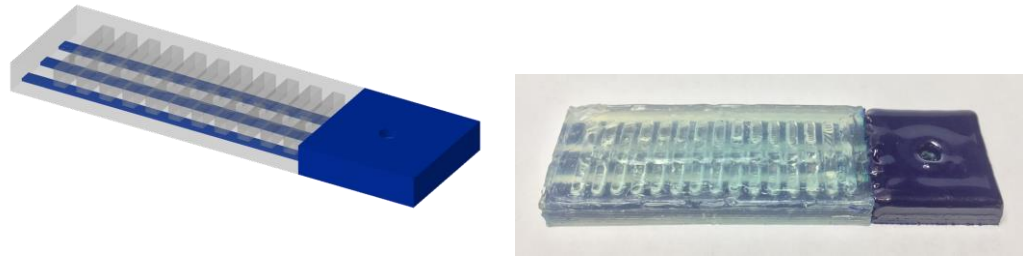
CAD representation and optical image of Hybrid 3D Printed pneumatic soft actuator
